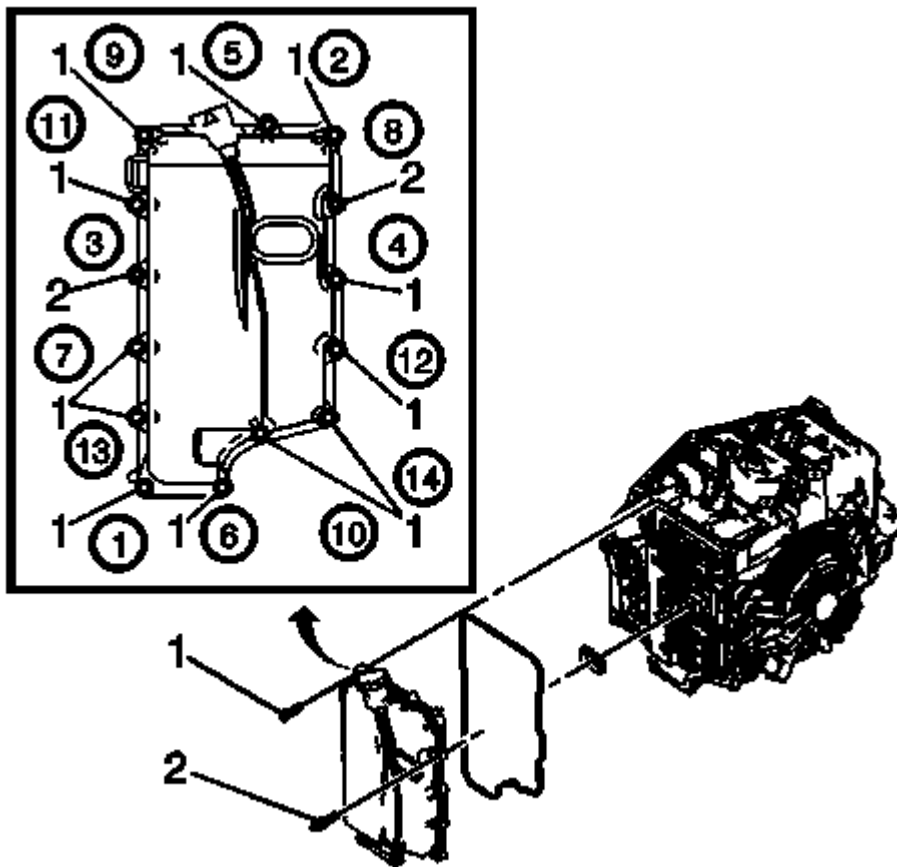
Identifying Control Valve Body Cover Bolts Torque Sequence
